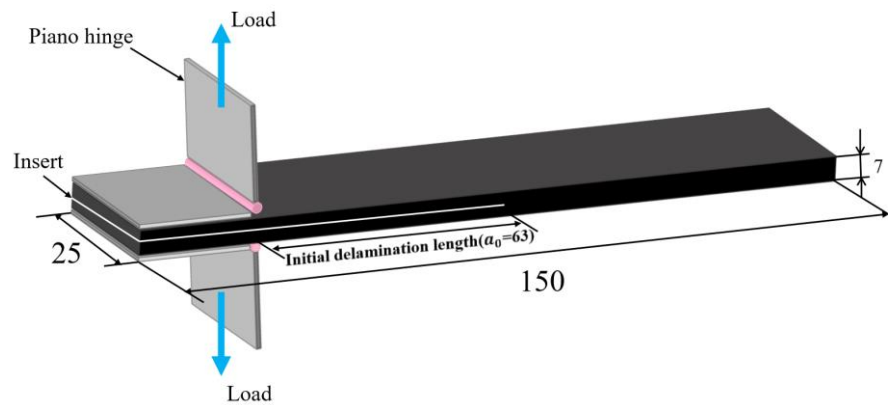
Schematic illustration of the DCB specimen and loading conditions (unit: mm)
